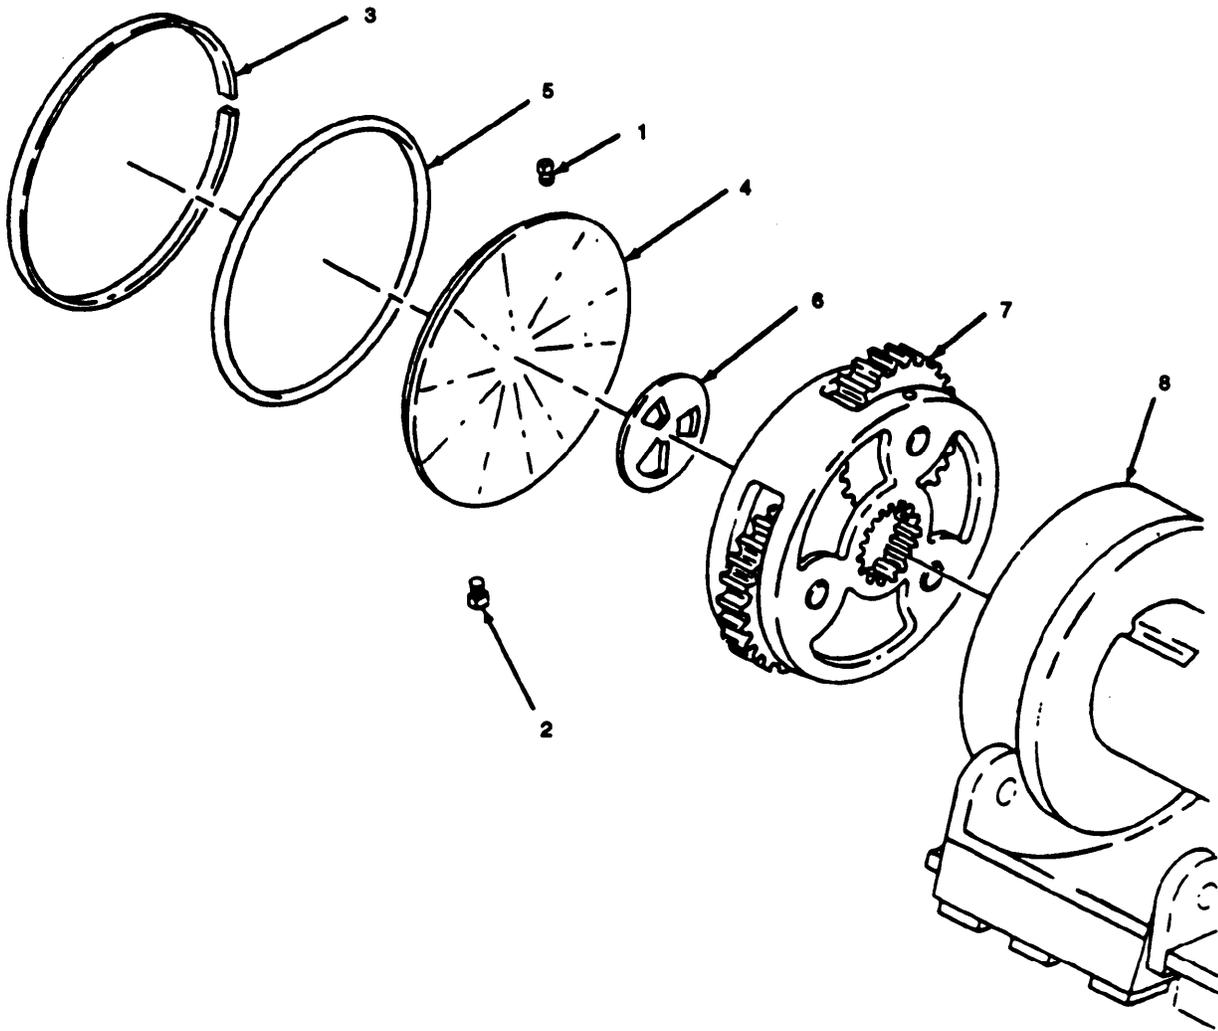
Winch Assembly Model 11-S-EC, Reassembly (Sheet 10 of 10).
